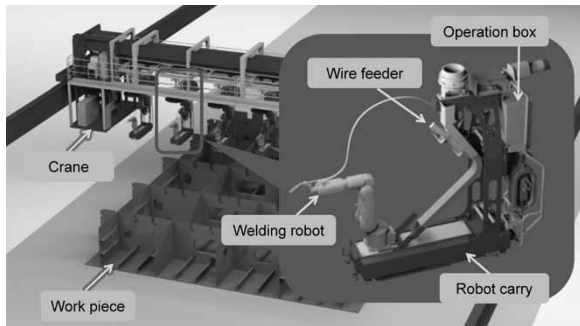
Assembly welding robot system for shipbuilding
